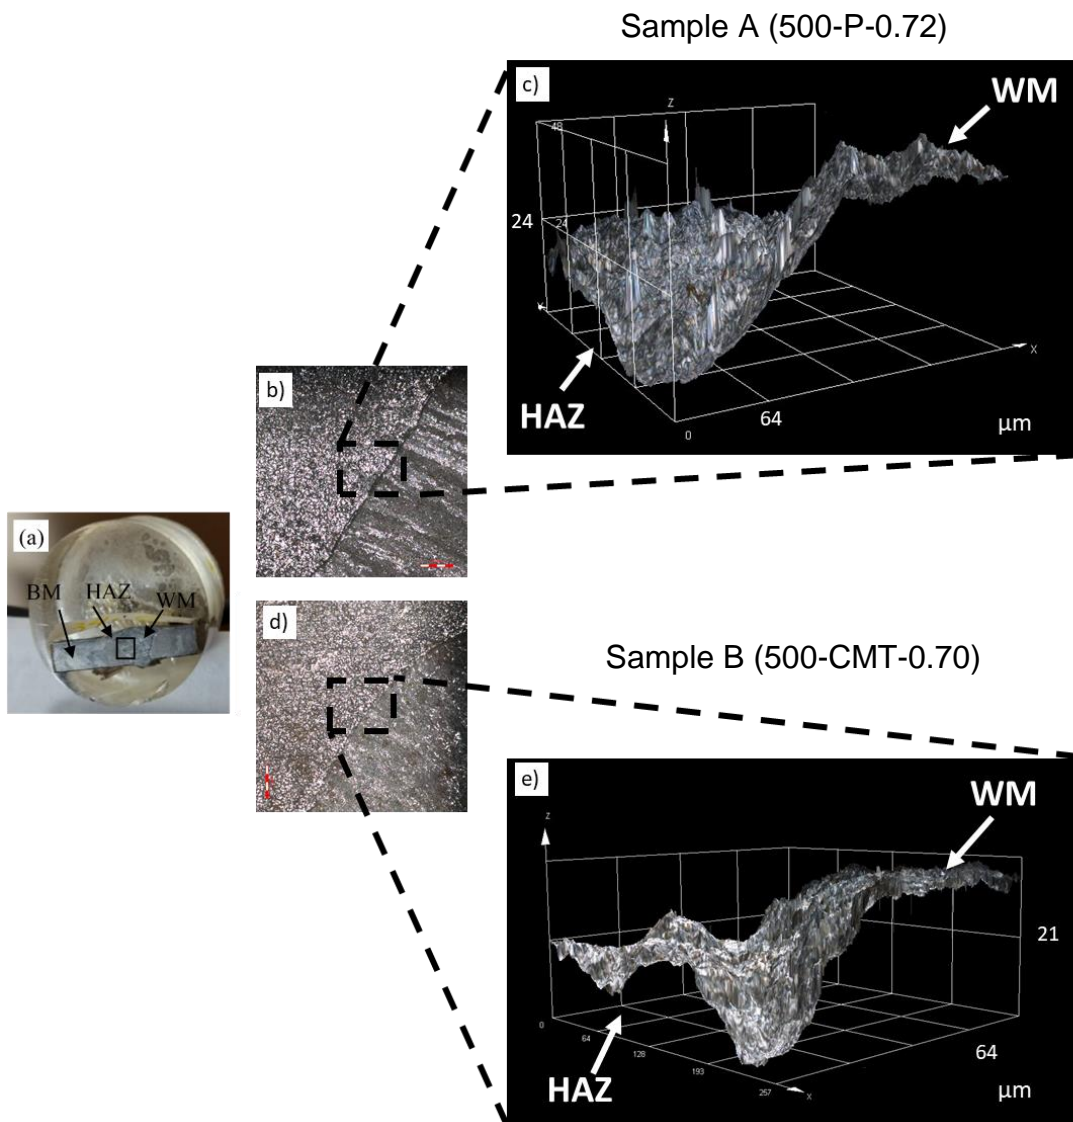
Welded joint after removing the corrosion product a) specimen b) 2D CLSM image c) 3D CLSM image of sample A (LNE500) and d) 2D CLSM image e) 3D CLSM image of Sample B (LNE500).
